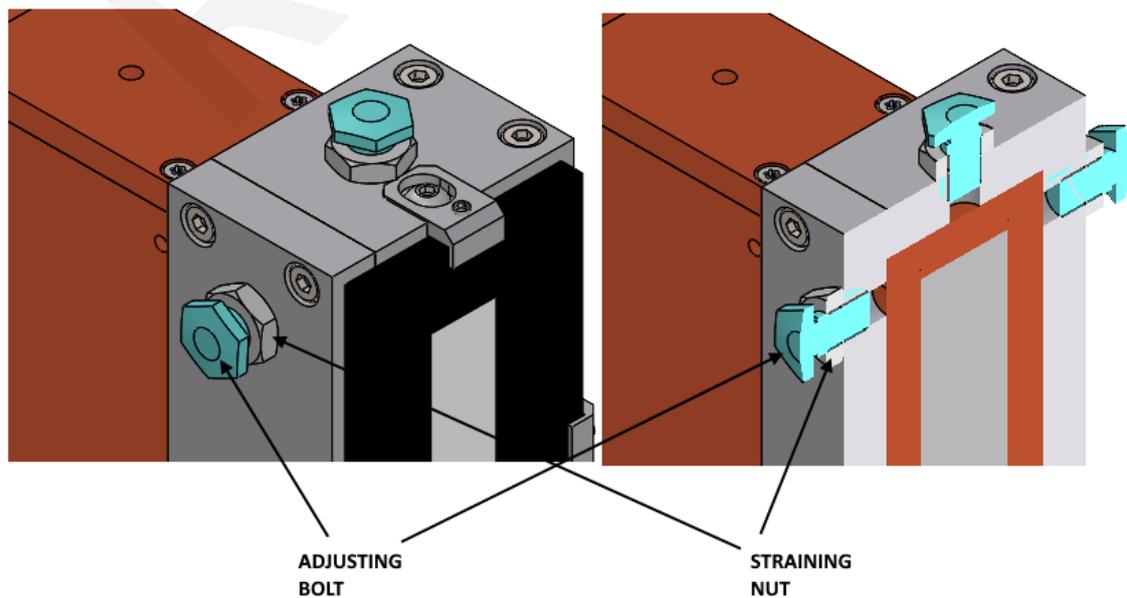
Left – the adjusting bolt with the straining screw. Right – showing the same in section view.
